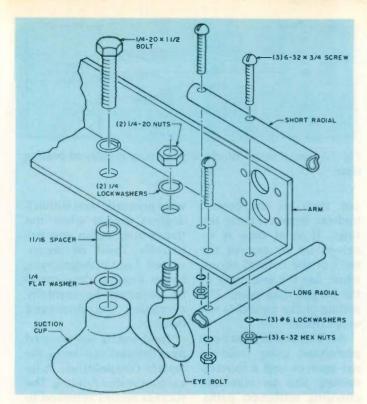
Radial element assembly. The eye bolt and suction cups are required only for car mounting.
